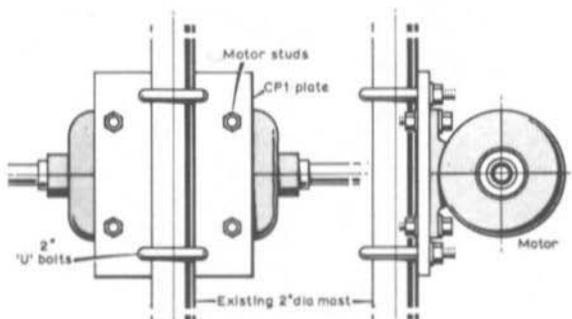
Mounting the Stolle rotator horizontally on a mast
